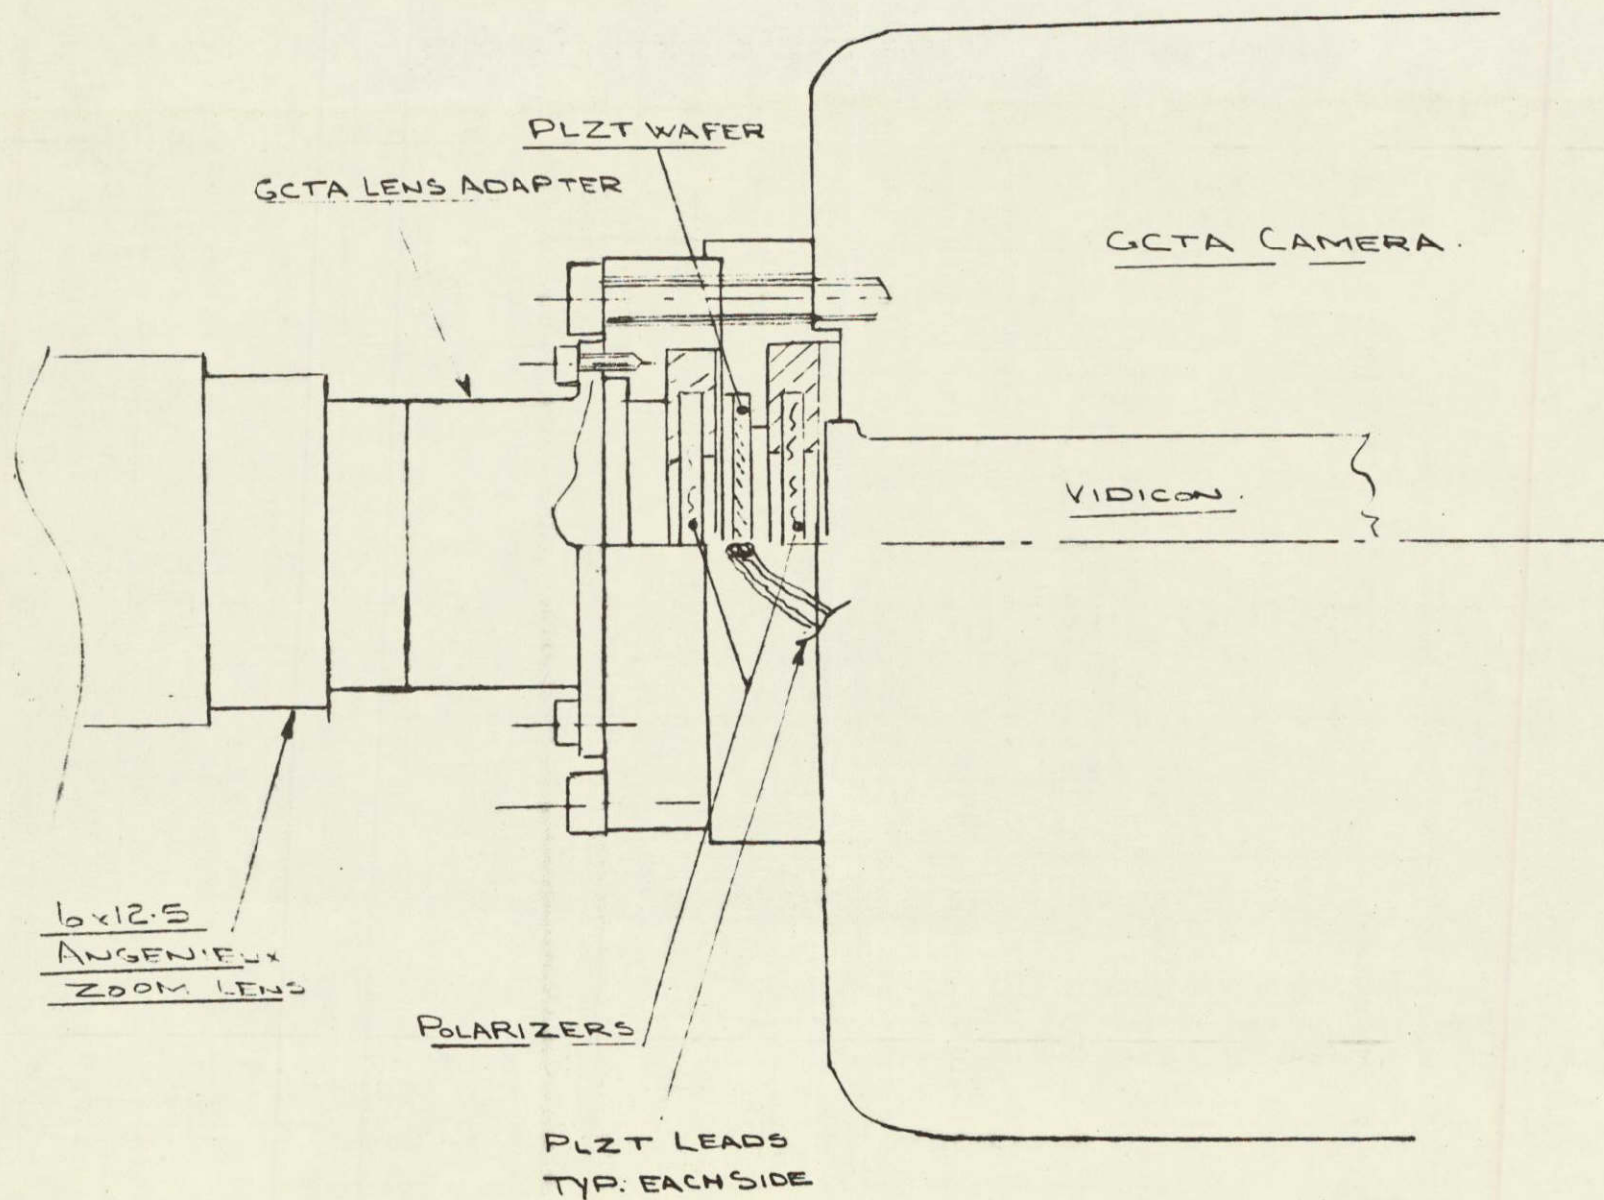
SFEF Holder Assembled to Camera, Cross-Section
